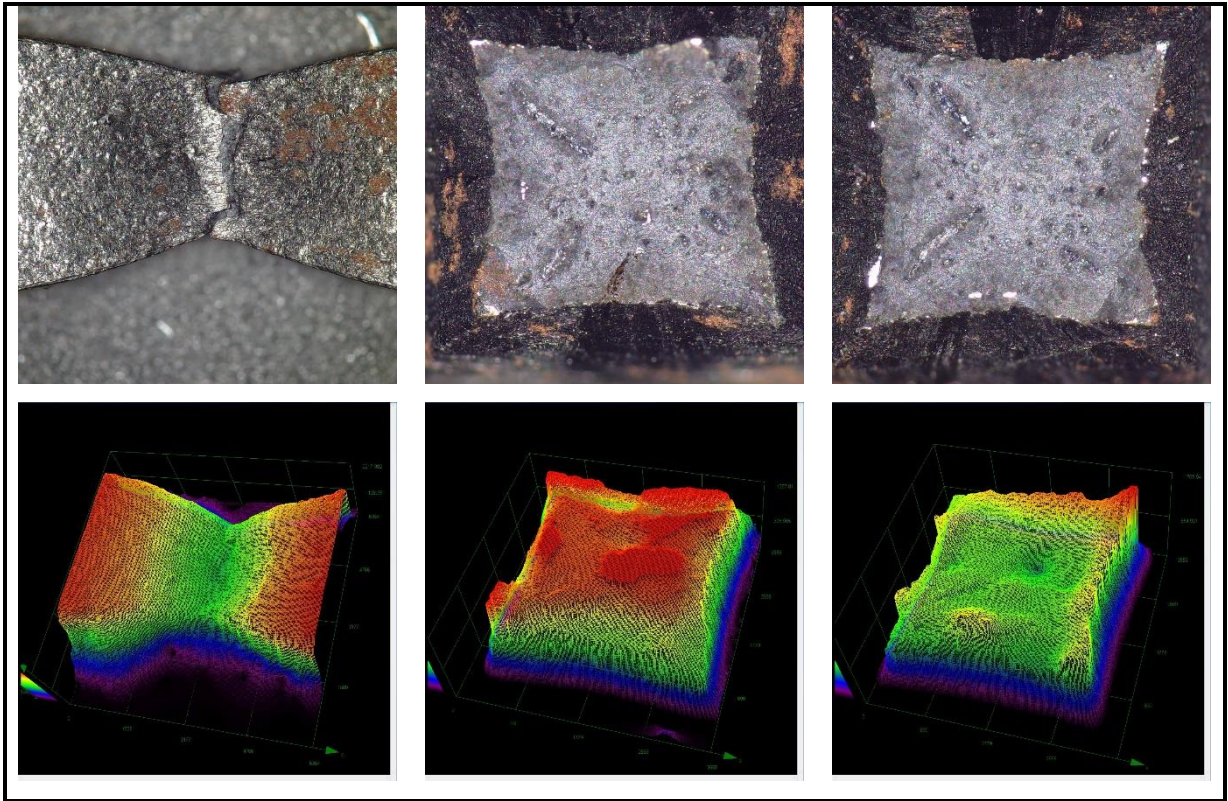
S4 test specimen fracture surface optical and height-contrast images
